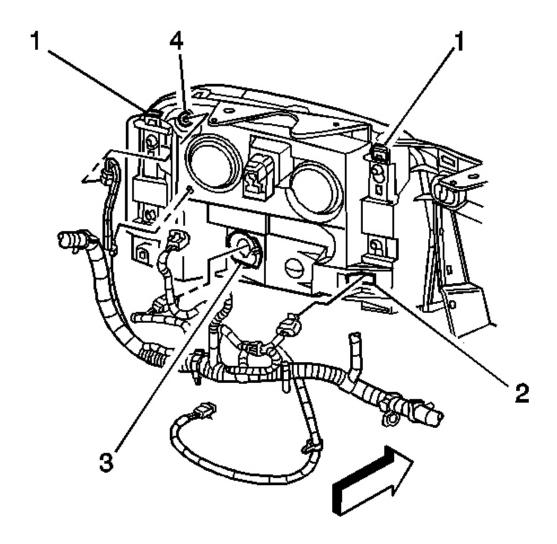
Locating Headlamp Components (TrailBlazer) Courtesy of GENERAL MOTORS CORP.
